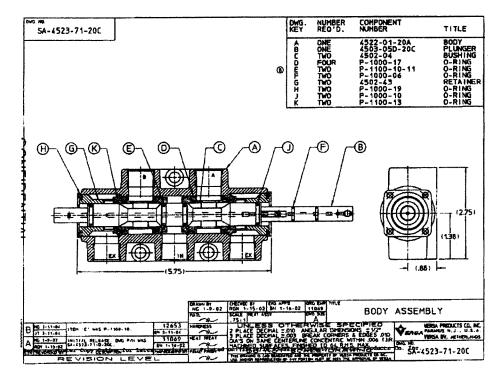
Engineering Drawing of Versa Valve Part No. VGK-4523-20C-D0
